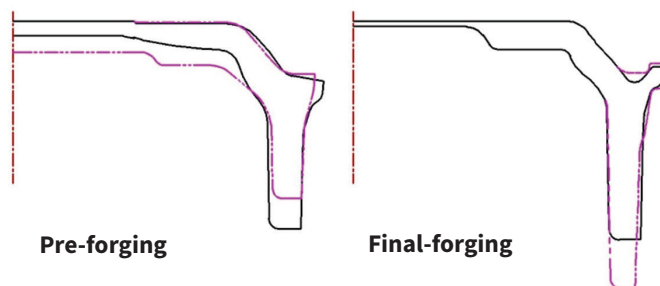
The solid line indicates the final blank, while the dotted line shows the initial blank.
